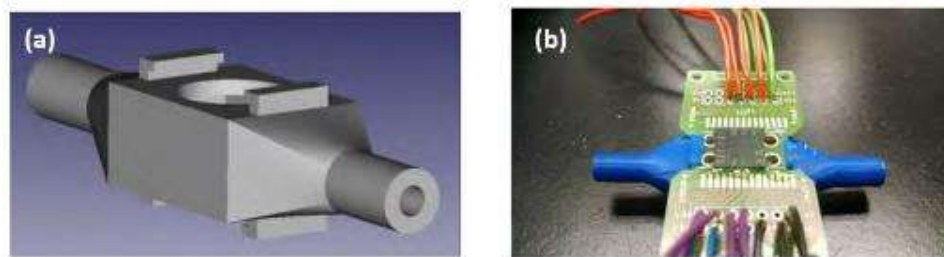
(a) 3D printed housing for the optical sensor. (b) Final device package with sensor on wirebonded PCB
